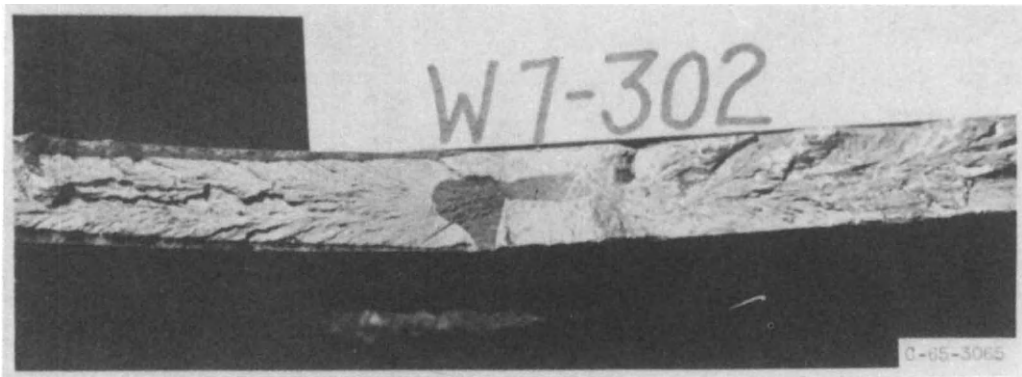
Typical chevron markings on fracture surface showing directions of fracture propagation away from black origin.
